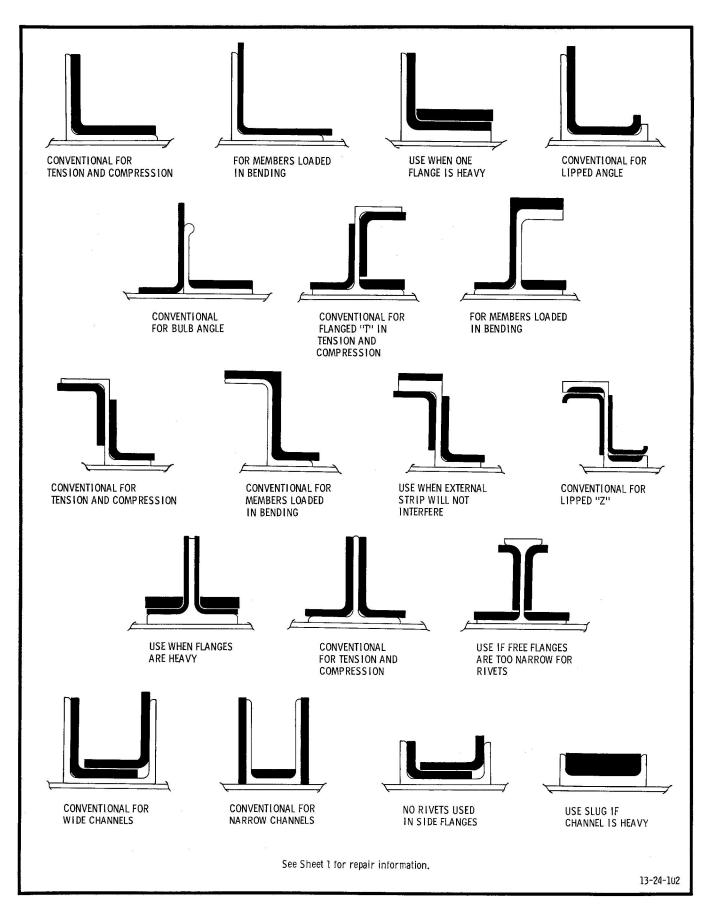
(Sheet 2 of 2) Formed and Extruded Section Splice - Arrangement of Repair Members
